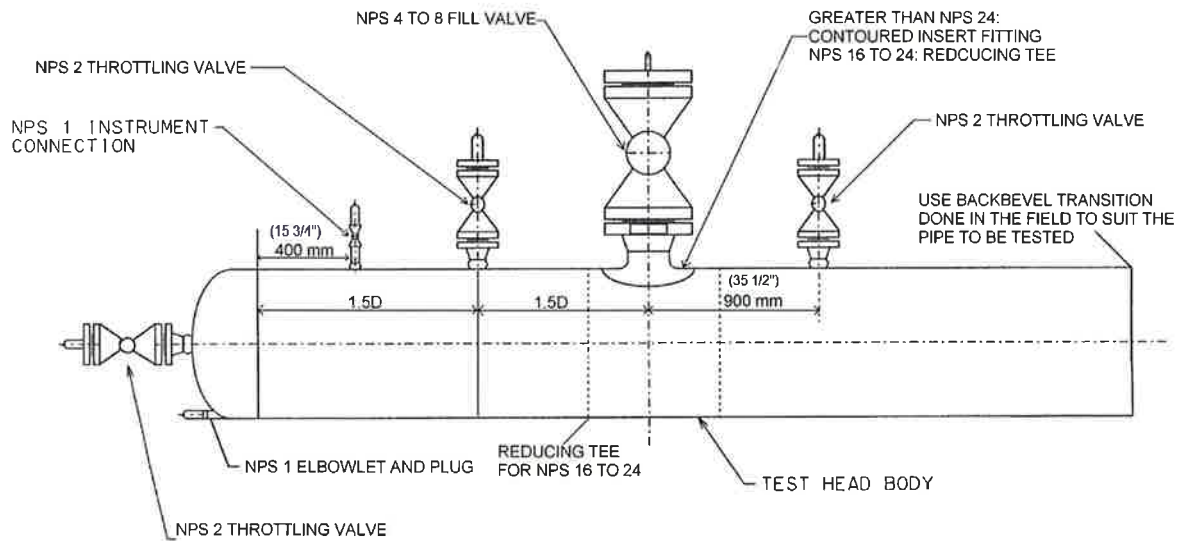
Sample Test Head Layout (NPS 16 to NPS 48)
